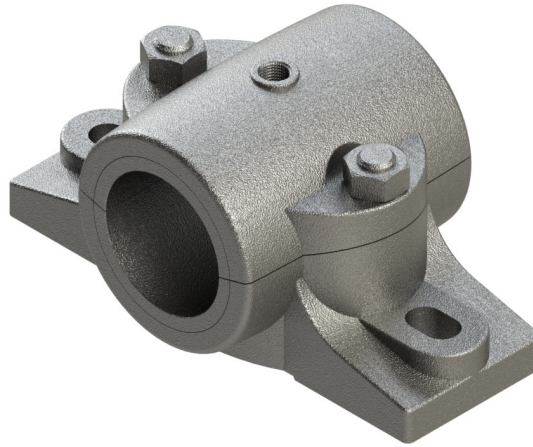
$2\frac{1}{2}$ " split housing babbitt bearing [9]
